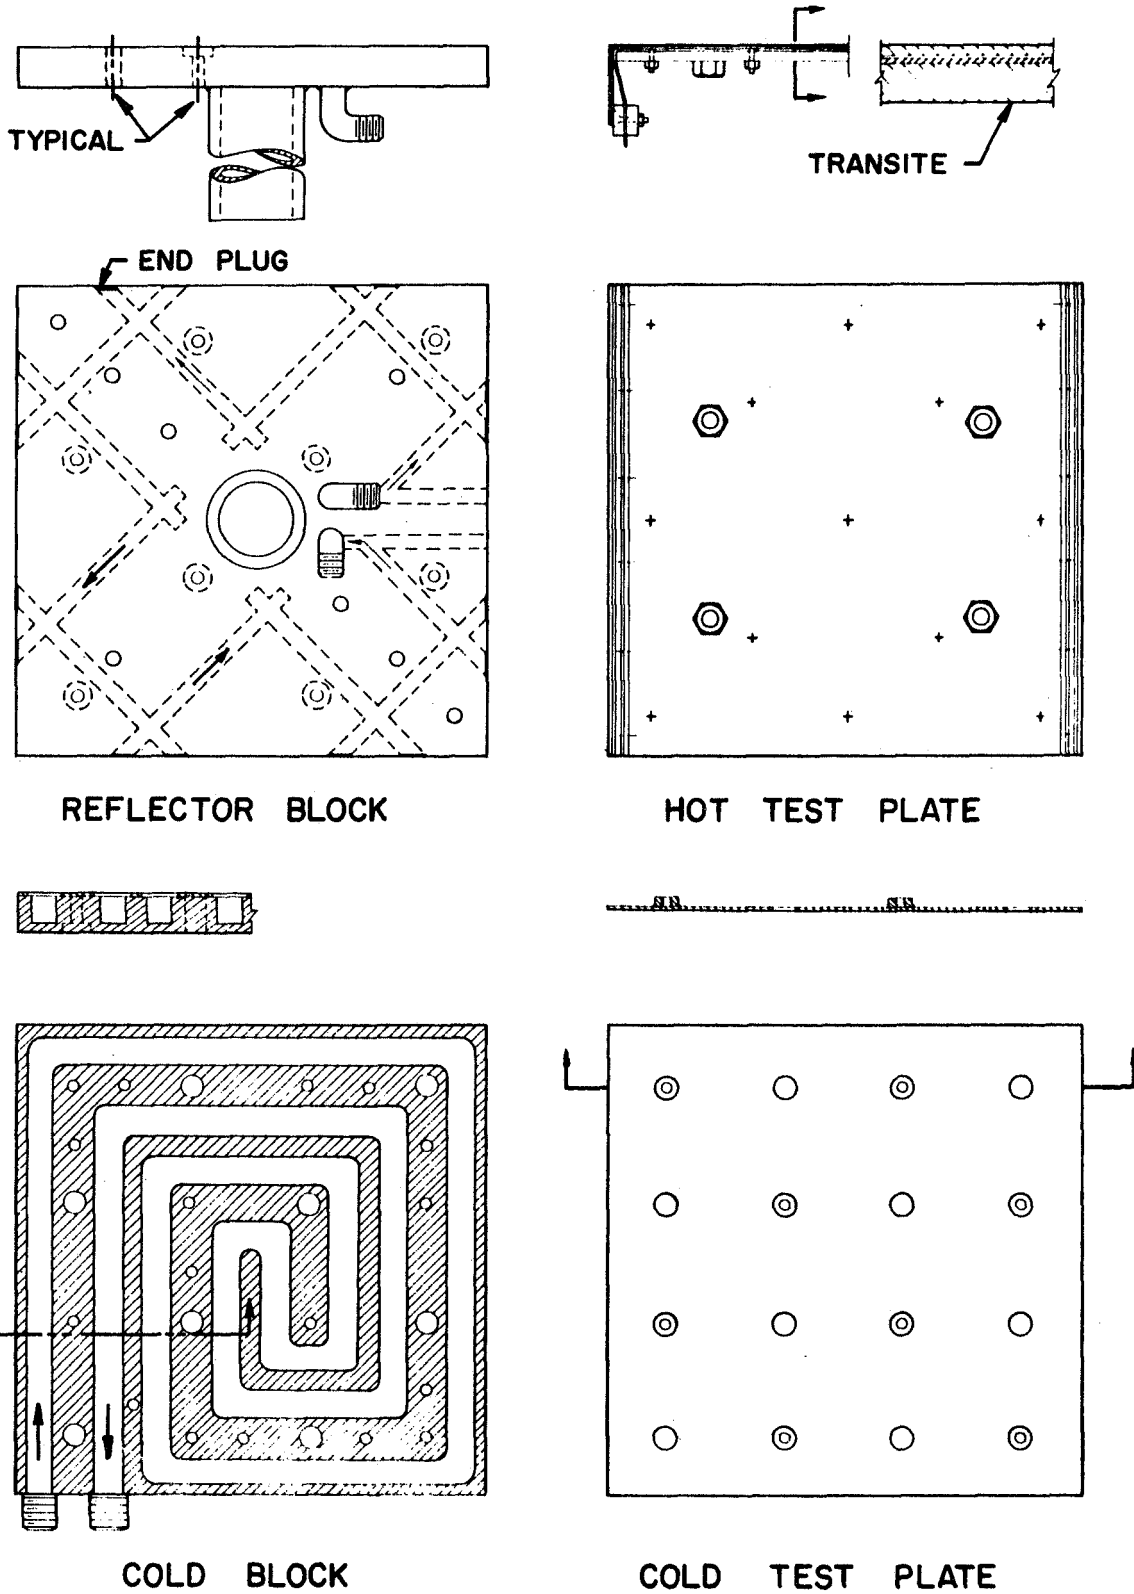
Design Sketch of Cold Block, Reflector Block, Hot Test Plate and Cold Test Plate.
